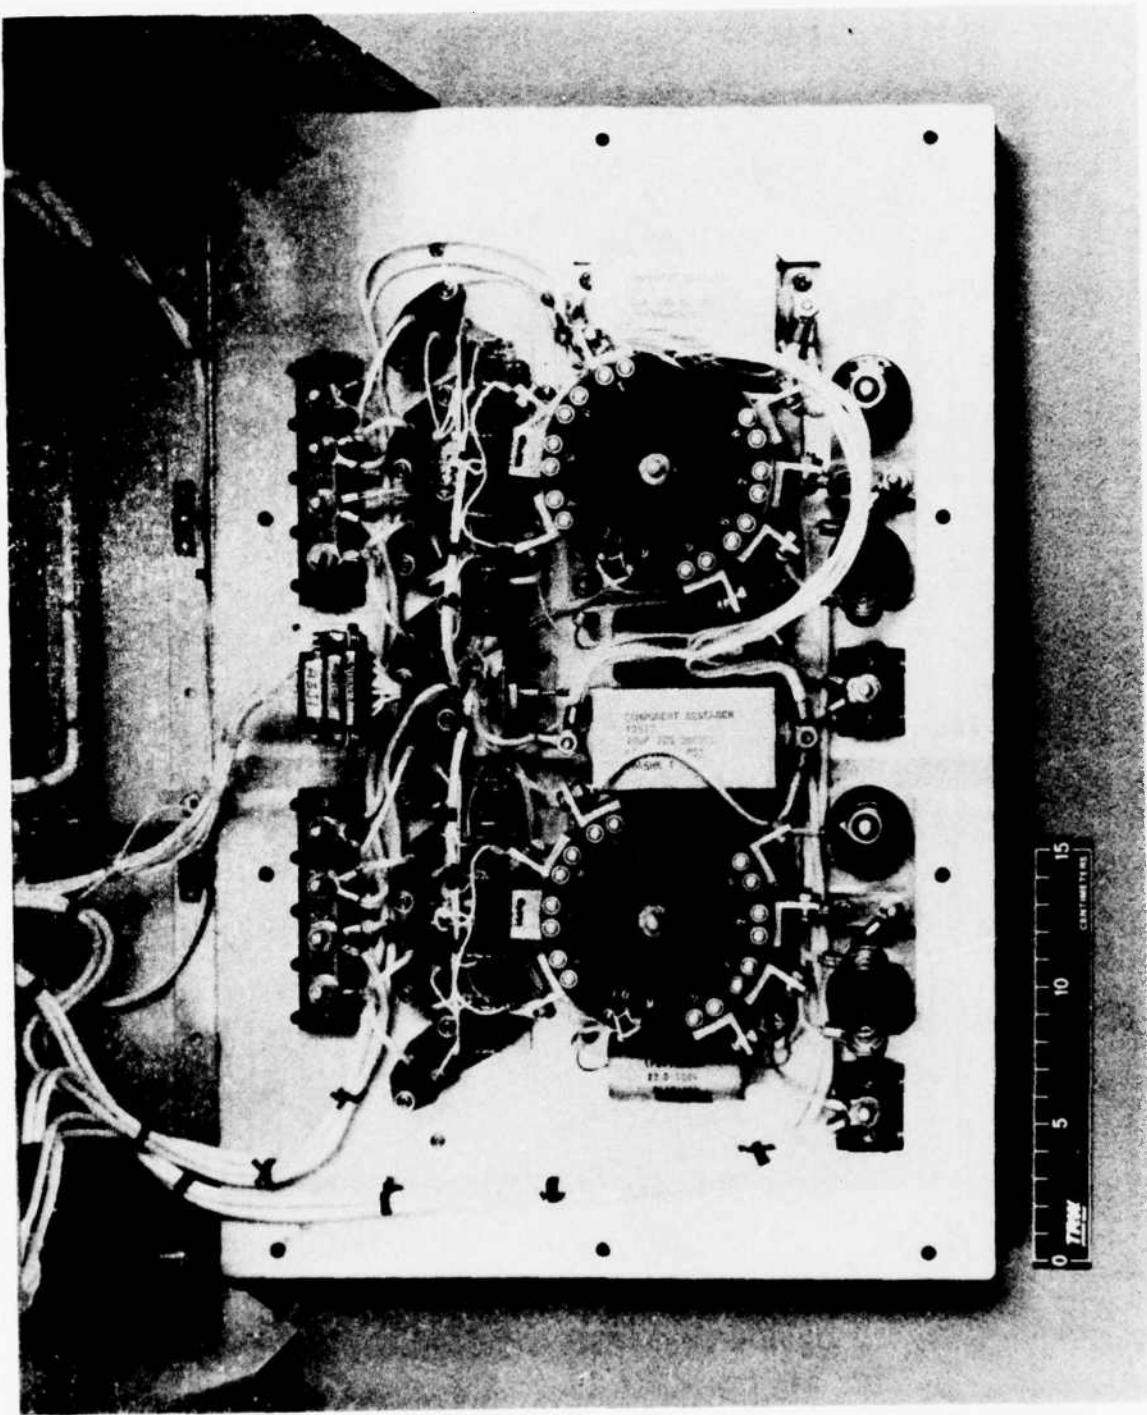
POWER MODULE VIEW (SIDE PANEL)
